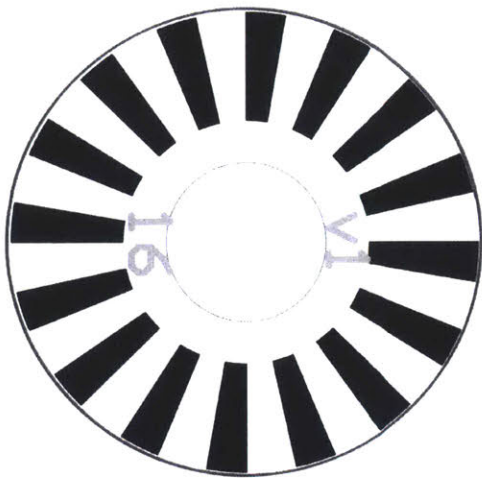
PCB Gerber of the wheel encoder pattern.
